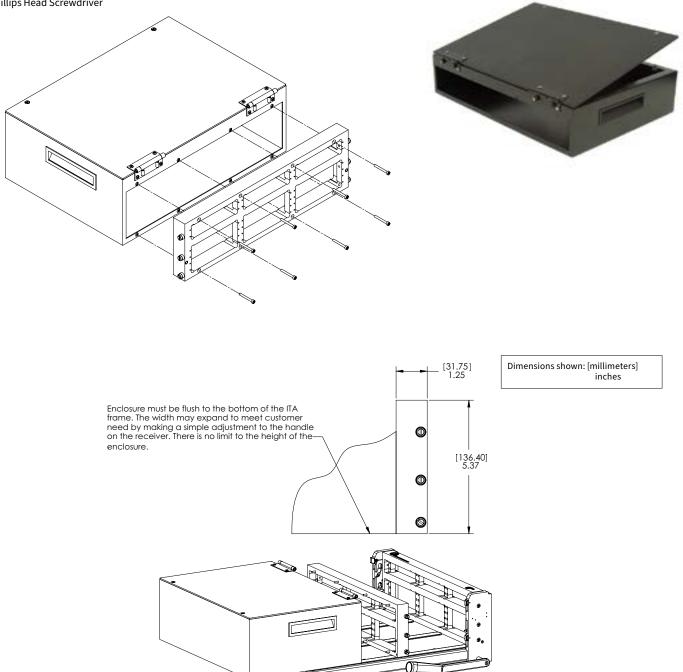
Figure A. Enclosures must be flush with the ITA bottom to ensure the proper function of the G12x system.
